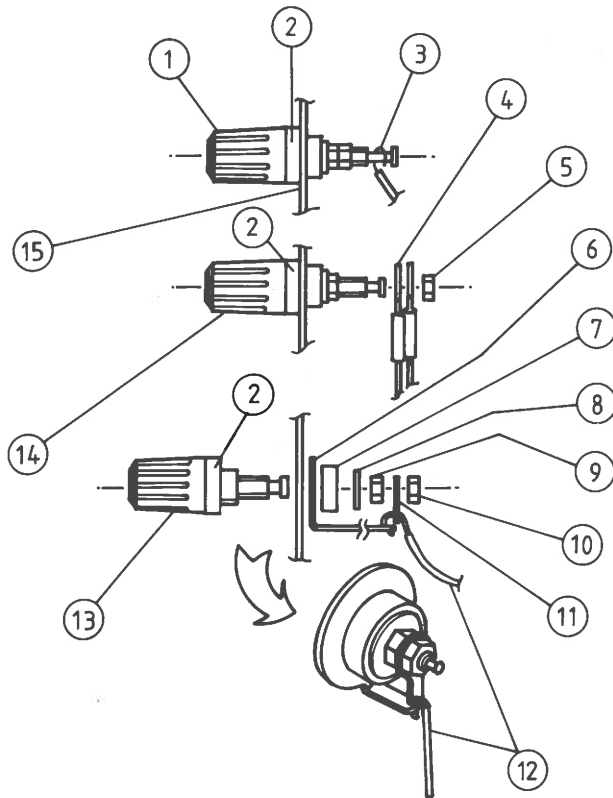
DISMANTLING/REASSEMBLY OF TERMINALS
